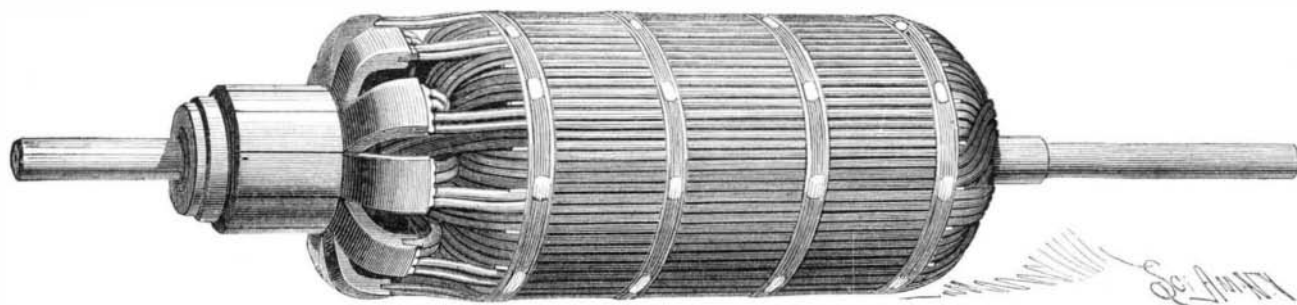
PERSPECTIVE VIEW OF ARMATURE.
